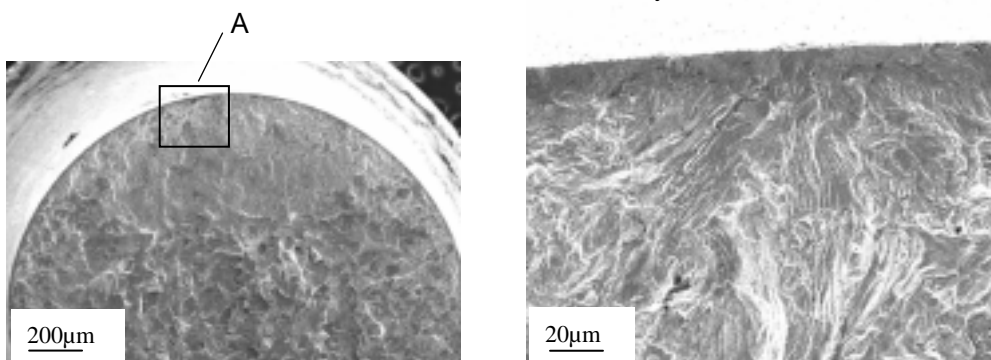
Fracture surfaces of smooth specimen after nitriding
